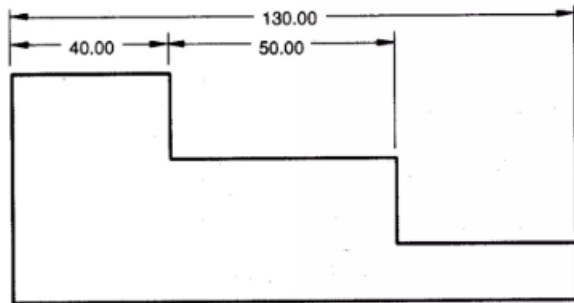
Staggered positions for dimension values make it easier to read the dimensions.
